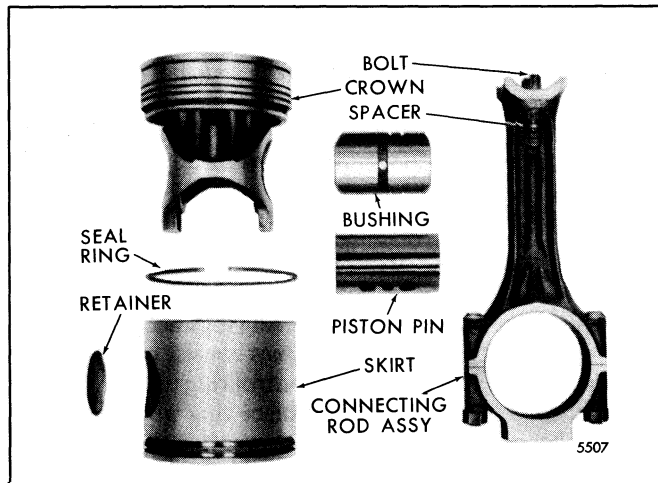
Cross-Head Piston and Connecting Rod Components
